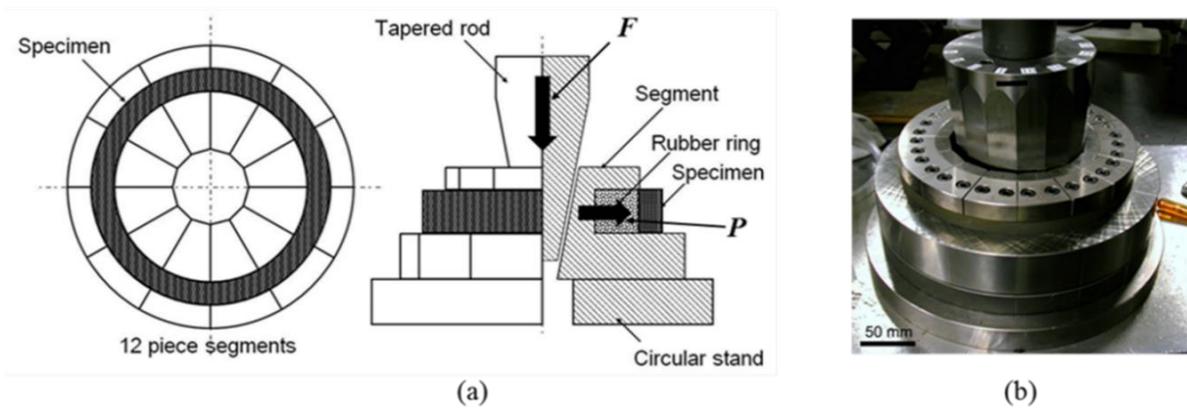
Ring burst test: (a) setting and motion of the fixture and (b) view of the fixture for a type C specimen.
